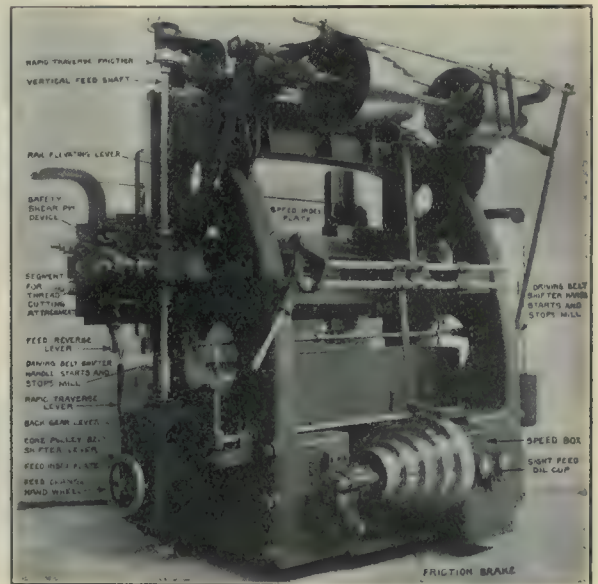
Rear View New Model Mills, Colburn Machine Tool Co.
